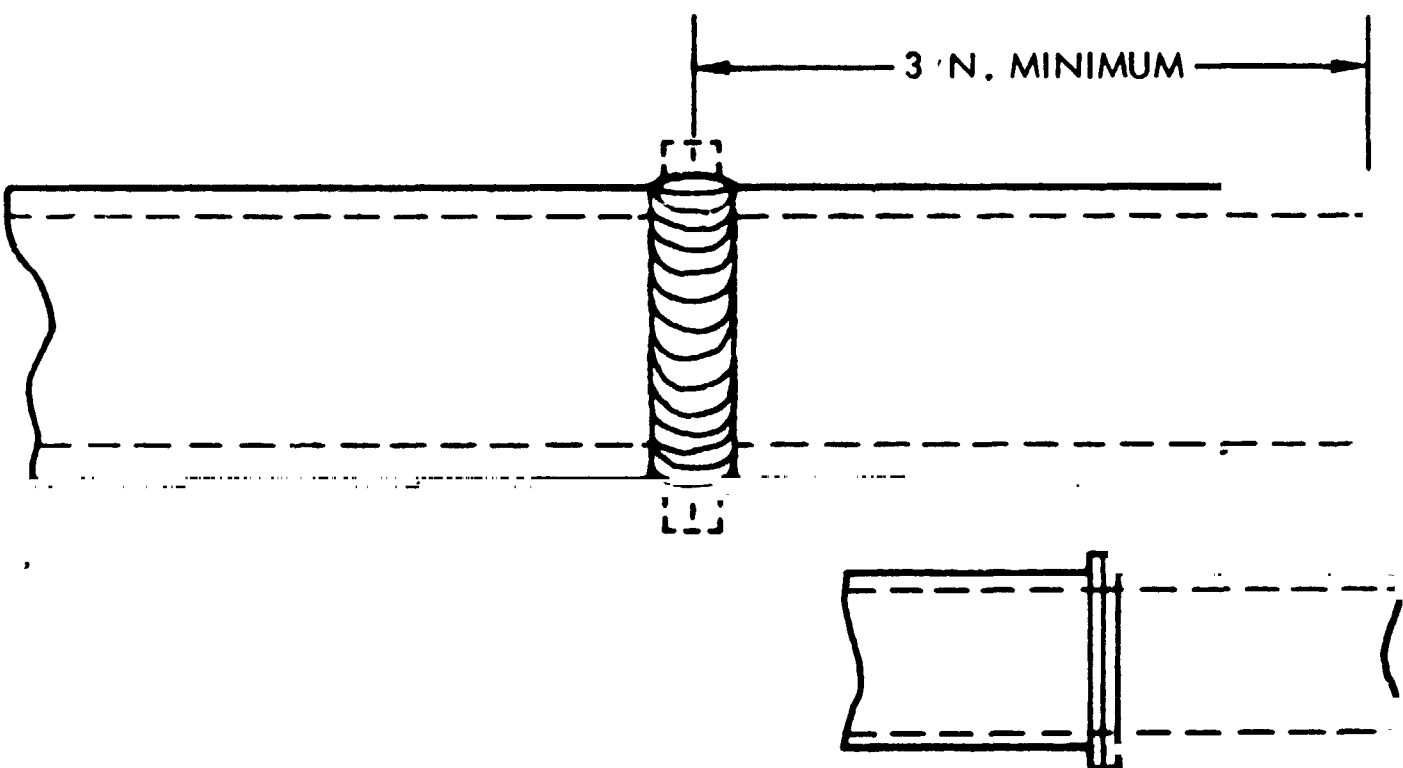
Flange Weld Joint Specimen - Tubing (Manual and Machine)
